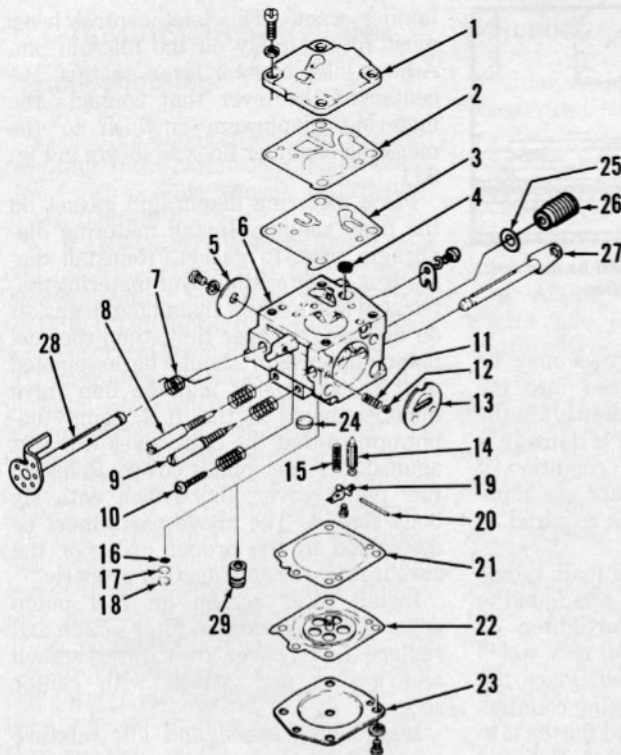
Exploded view of Tillotson Model HS carburetor.
